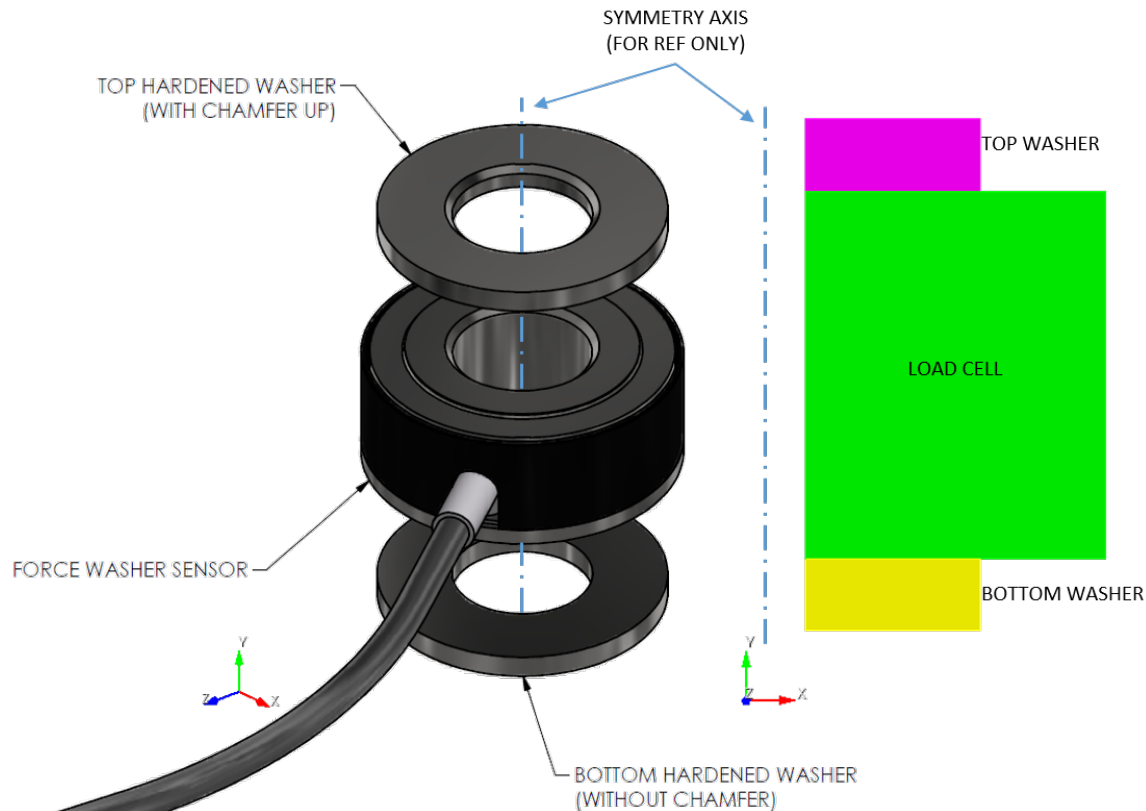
From left to right: (a) Exploded view of the load cell assembly. (b) (Scale increased for visibility) Axisymmetric representation of the load cell assembly.
